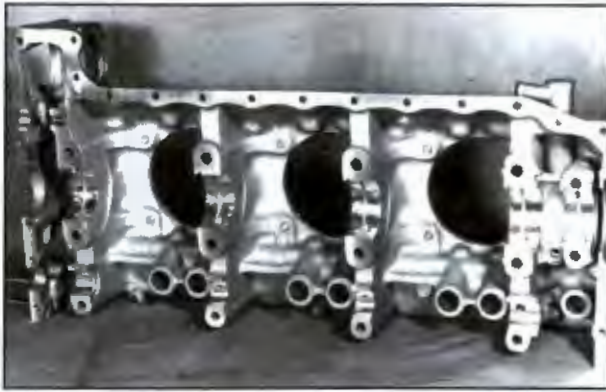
A dimensional inspection of the main journal bearing inserts and camshaft bearings requires assembly of the crankcase halves. Use a telescoping gauge and micrometer to determine the appropriate clearances.
